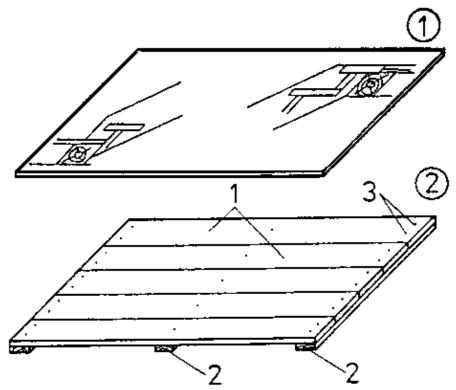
Representation of a drawing floor – (1) flat, clean plate (2) drawing floor made from boards – *1 boards, 2 supporting strings, 3 nails
